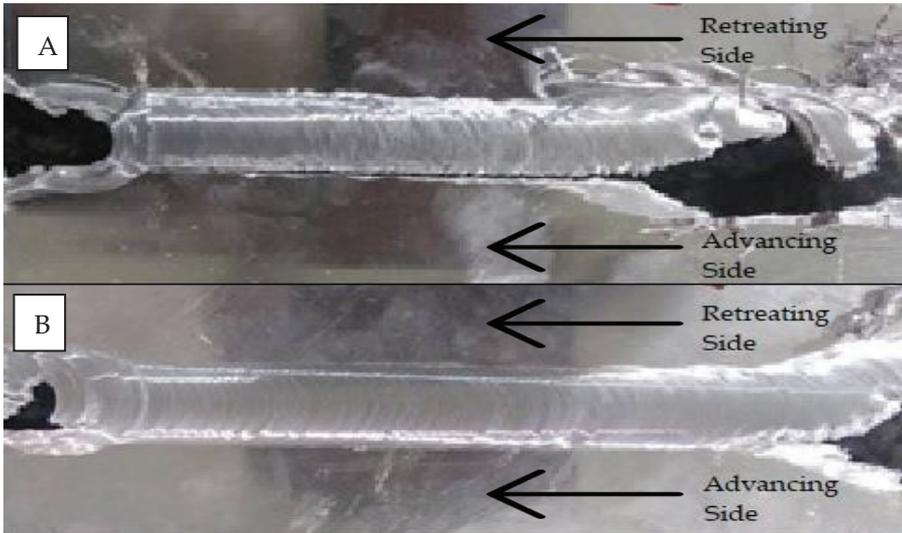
Welding quality for 6 mm thickness plate: (A) Tool 1 with 7° tapered and (B) Tool 2 with 5° tapered
